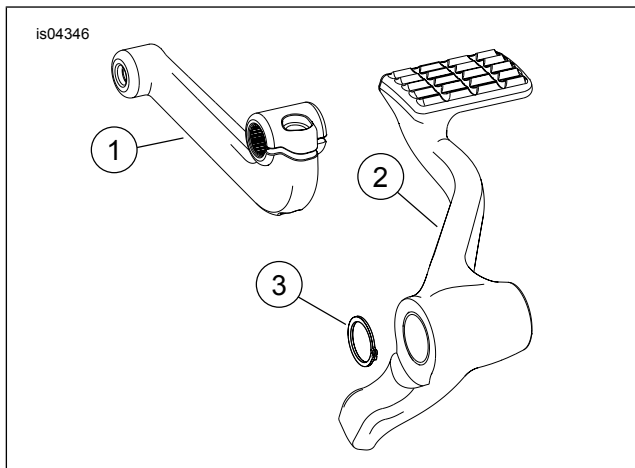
Service Parts: XL Brake Pedal and Shift Lever
